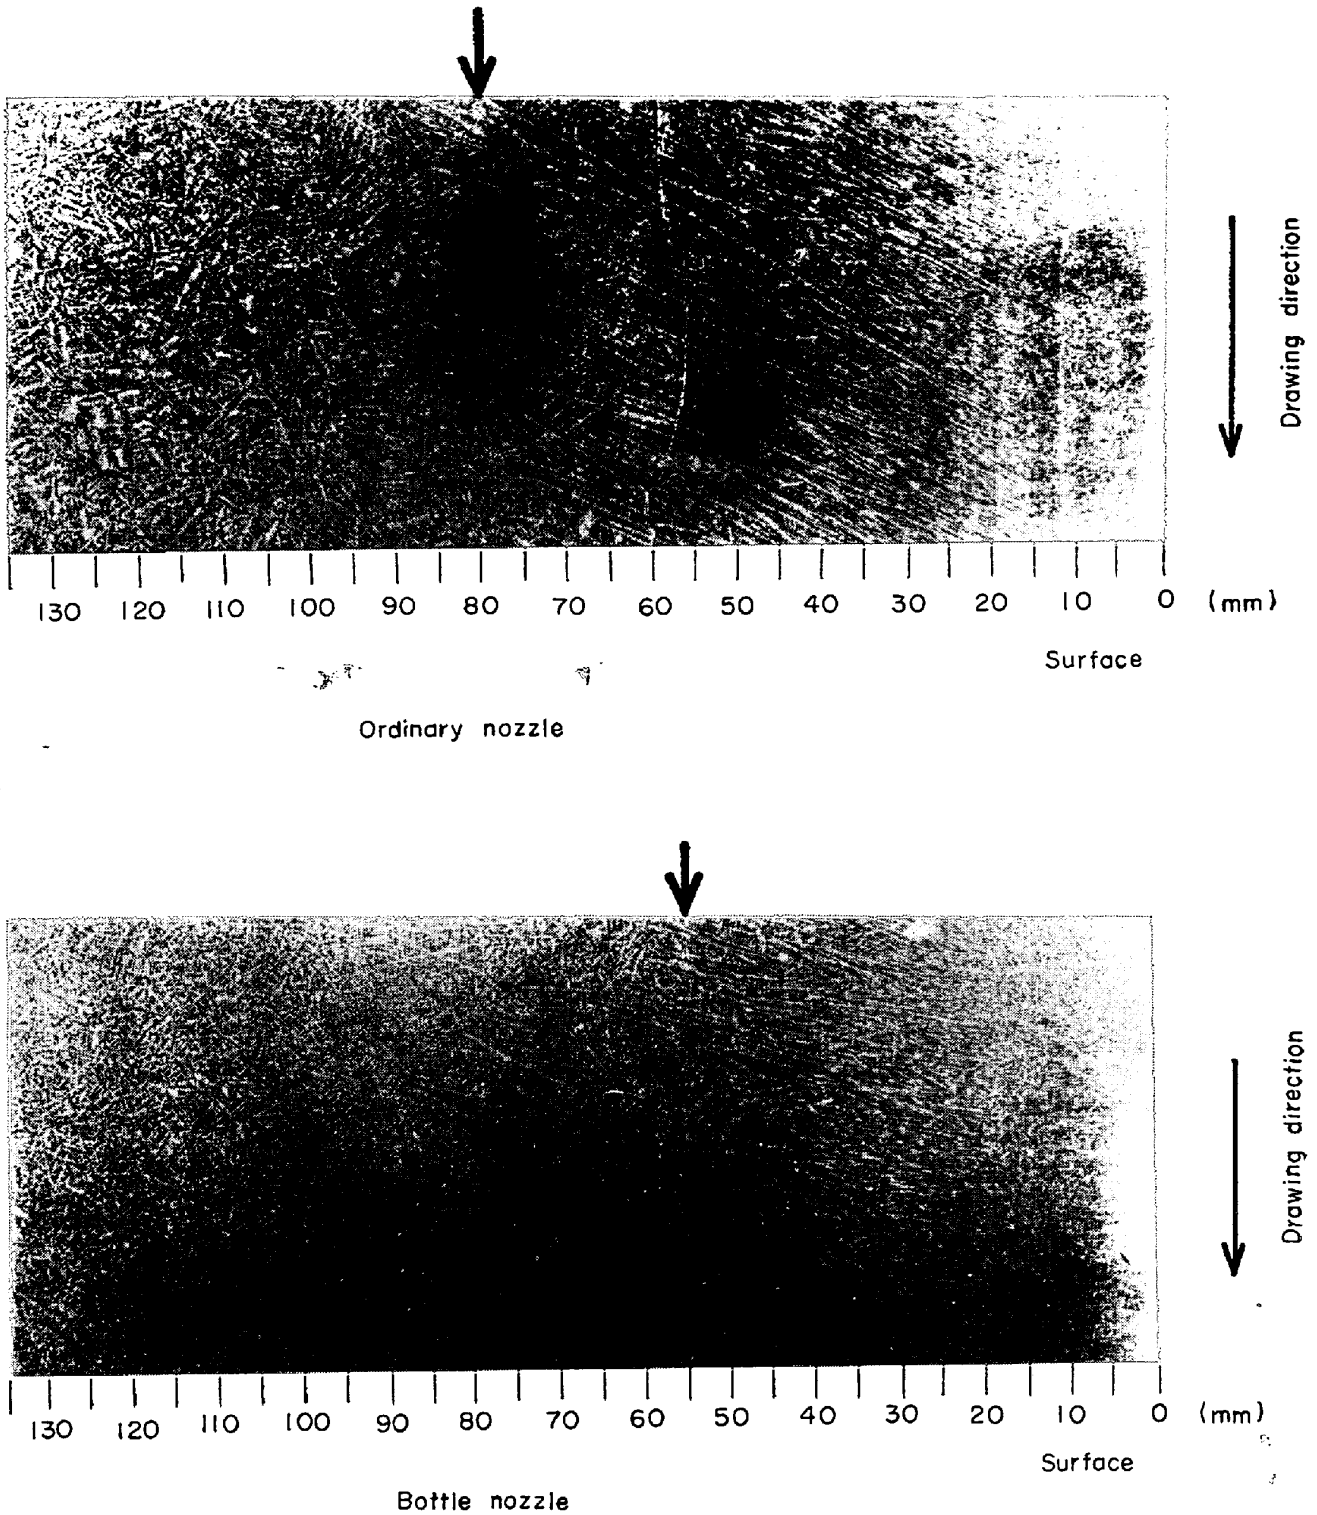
Cast structure on longitudinal section of slabs at narrow face.
